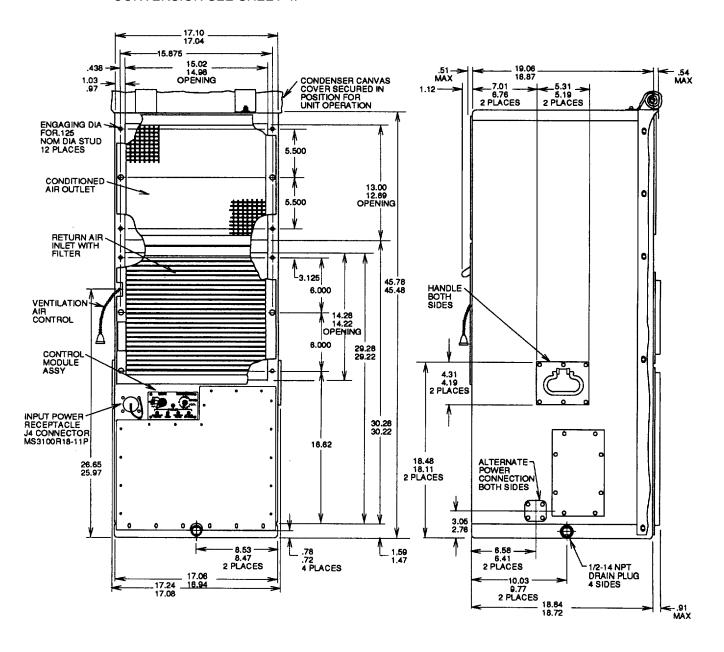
Installation Dimensions (Sheet 1 of 6)
